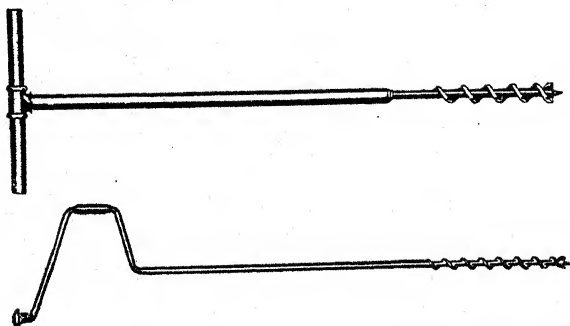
A Red Top Stump Auger with rigid handle (top) and with ball bearing crank handle (bottom)
